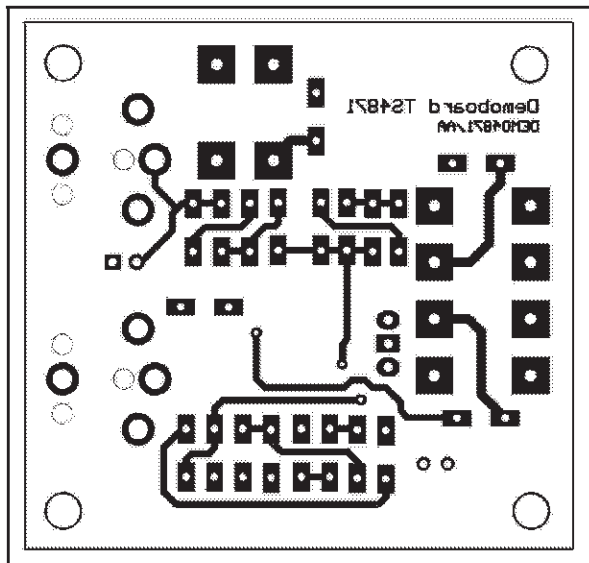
SO8 & MiniSO8 Demoboard Bottom Solder Layer
